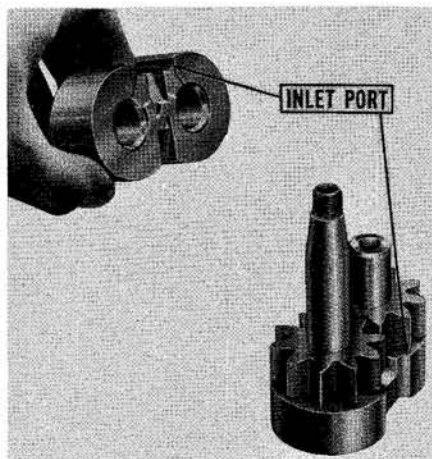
Assembly procedure of the hydraulic pump gears and bearings. Note the large cut-out area of bearings which are to be installed to the inlet port side of the pump housing.
